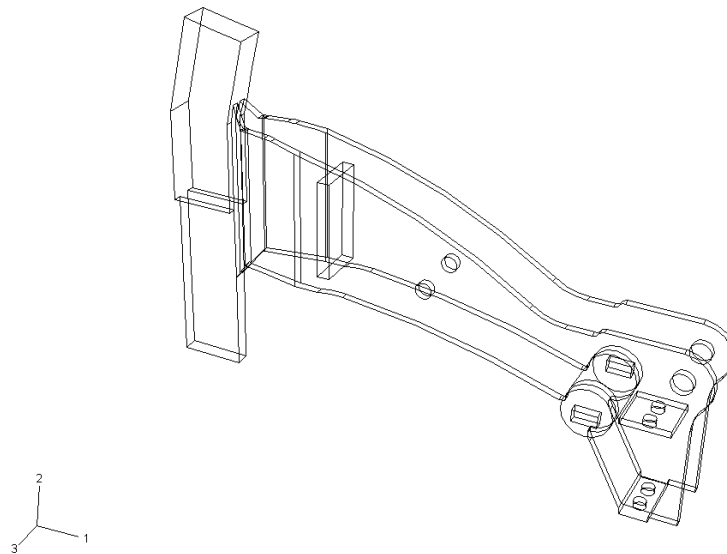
Modified Frame design to incorporate flanges and a brace
